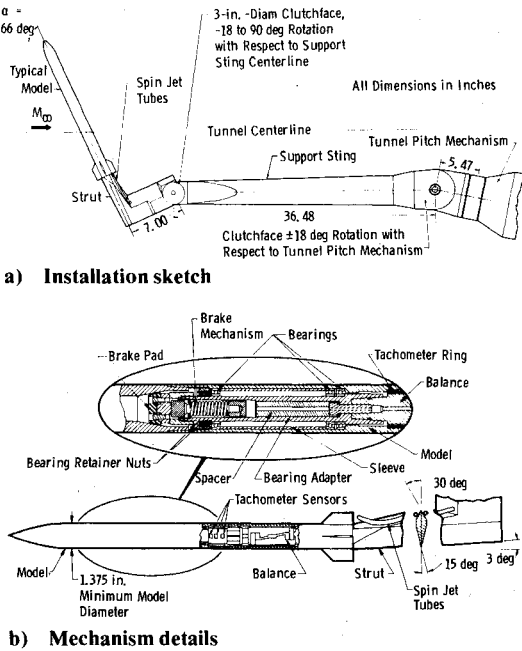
2.H High-Alpha missile roll-damping test mechanism.
